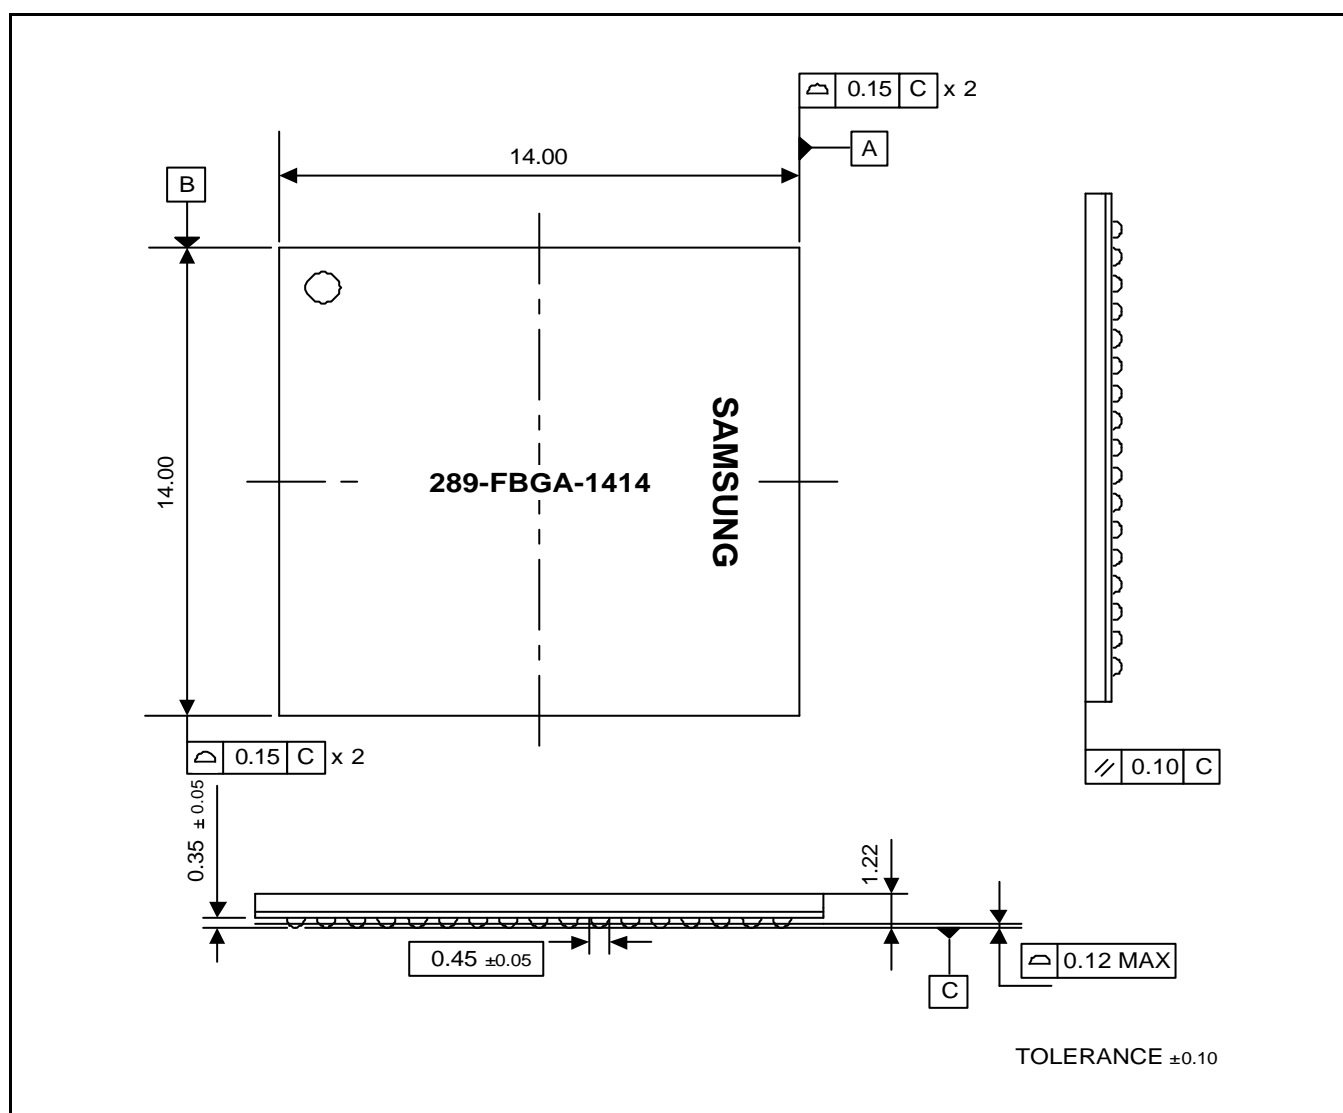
289-FBGA-1414 Package Dimension 1 (Top View)
